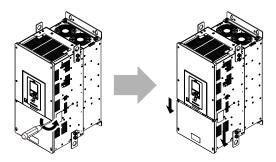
Loosen the Terminal Cover Mounting Screws
